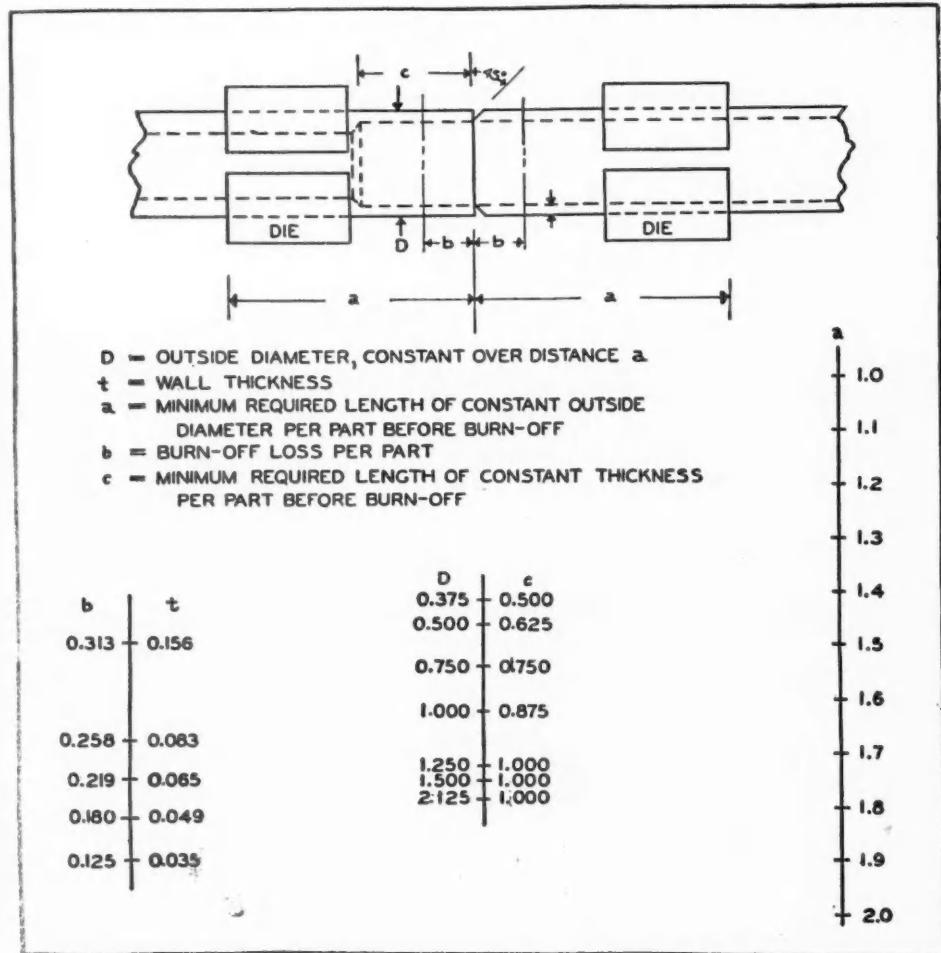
Burn-off loss and required lengths for parts to be flash welded.
